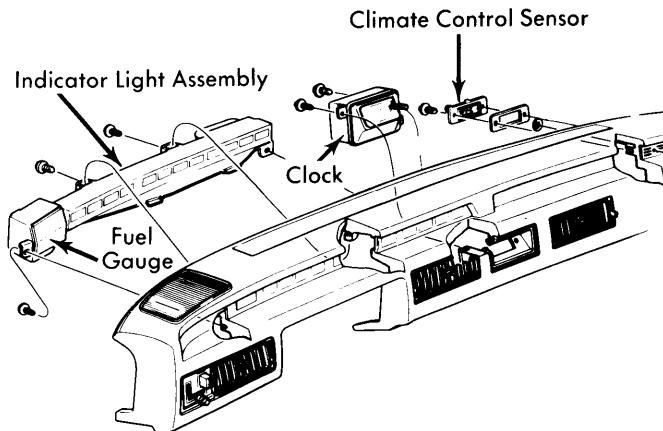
Cadillac Indicator Light & Fuel Gauge Assembly (Seville)
